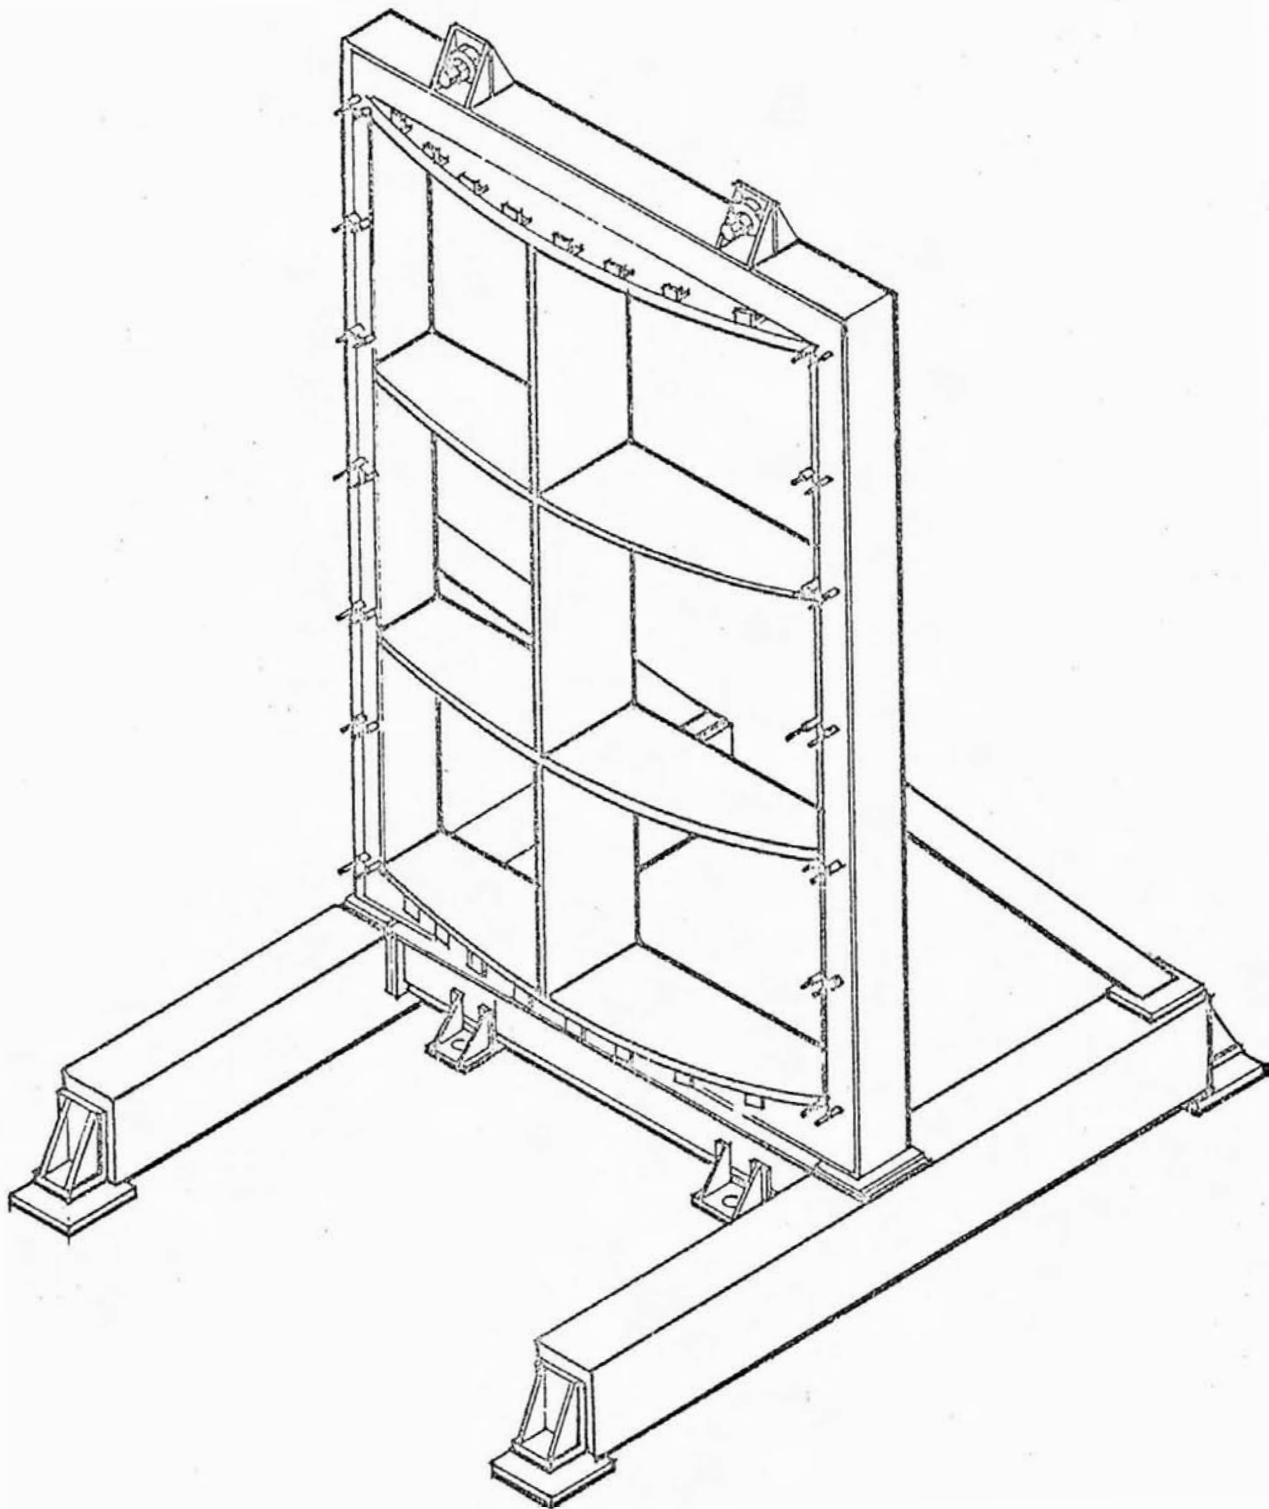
Skin Segment Assembly Fixture AF2-B425-14400
